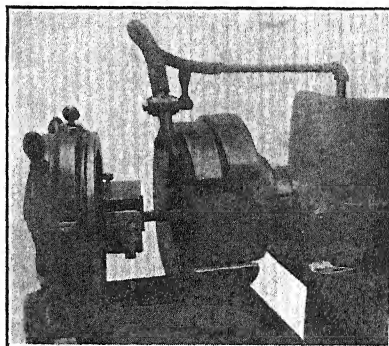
Fourth Position of Tool for Grinding the End Relief.
